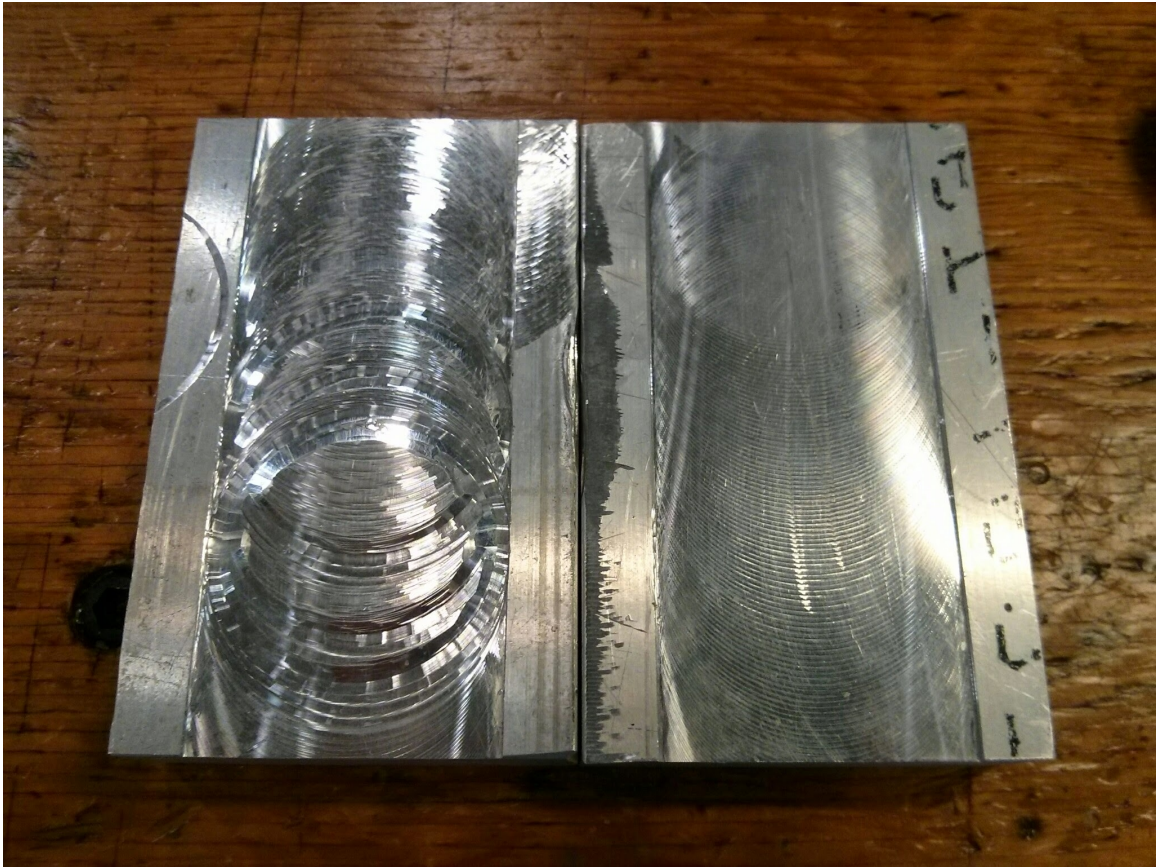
Surface finish left on parts after machining without (left) and with (right) magnetic damping
